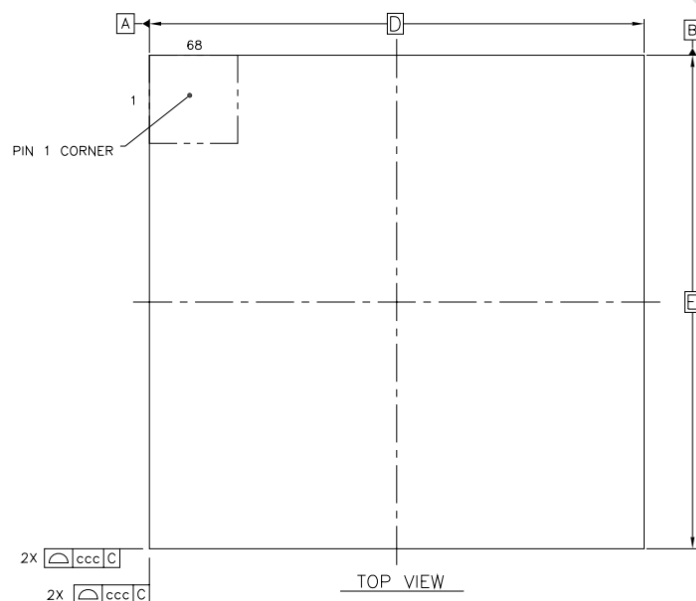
RKNanoD-N QFN68 Package Top View
